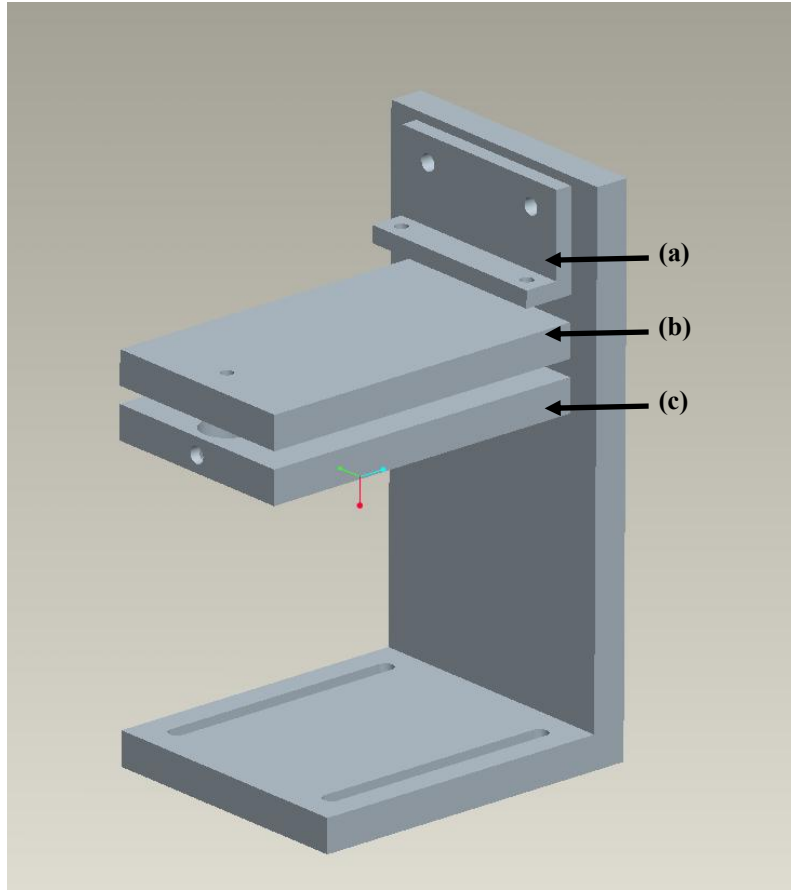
Drawing of the aluminum fixture used for alignment. (a) probe tip bracket (b) silicon wafer pedestal with light aperture (c) light pipe holder
